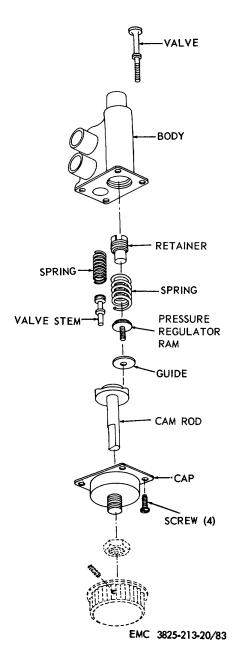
Windshield wiper control valve assembly, disassembly and reassembly, exploded view.
